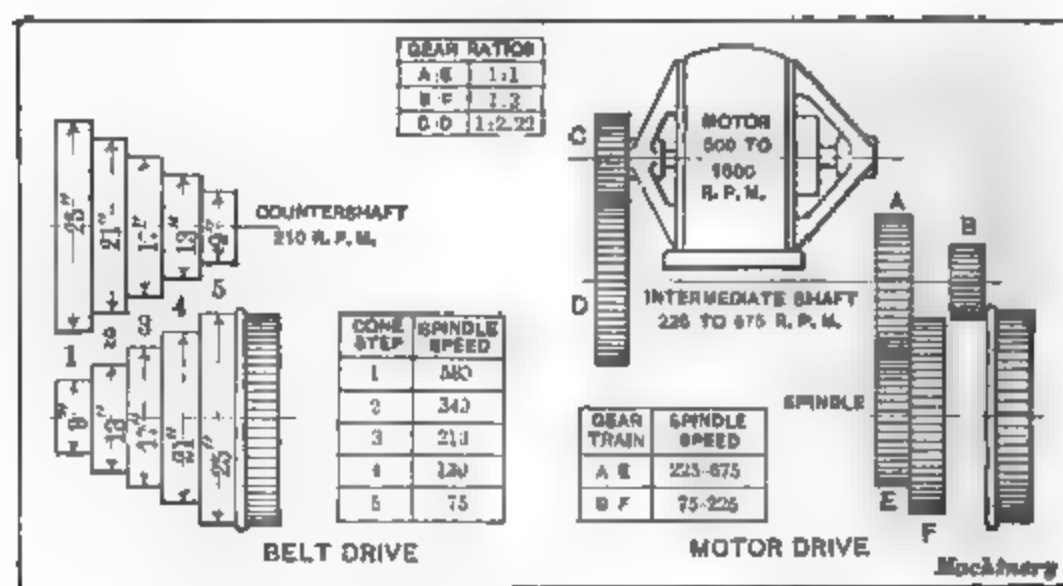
Comparison of Belt and Motor Drive of Engine Lathe
